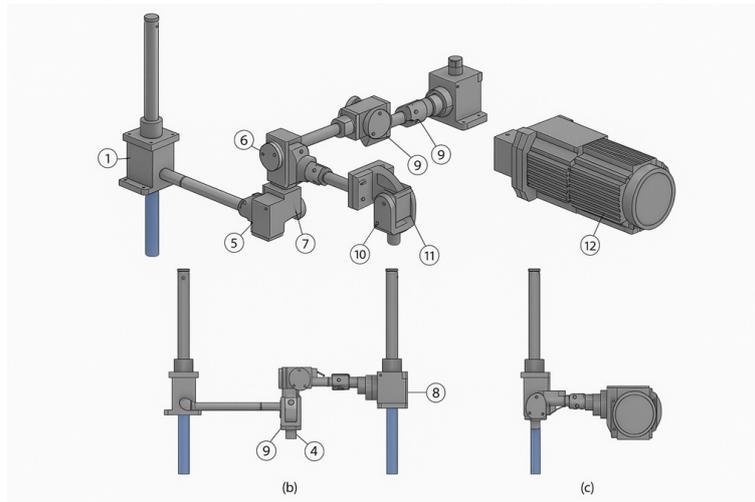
Mechanical diagram of the vertical load transmission system, showing screw jacks, shaft couplings, angular transmissions, and brushless motor assembly
